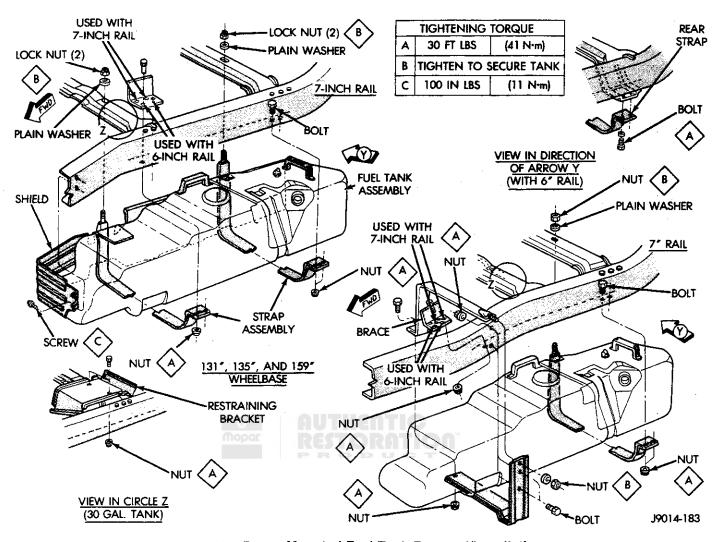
Mid-Frame Mounted Fuel Tank Removal/Installation
